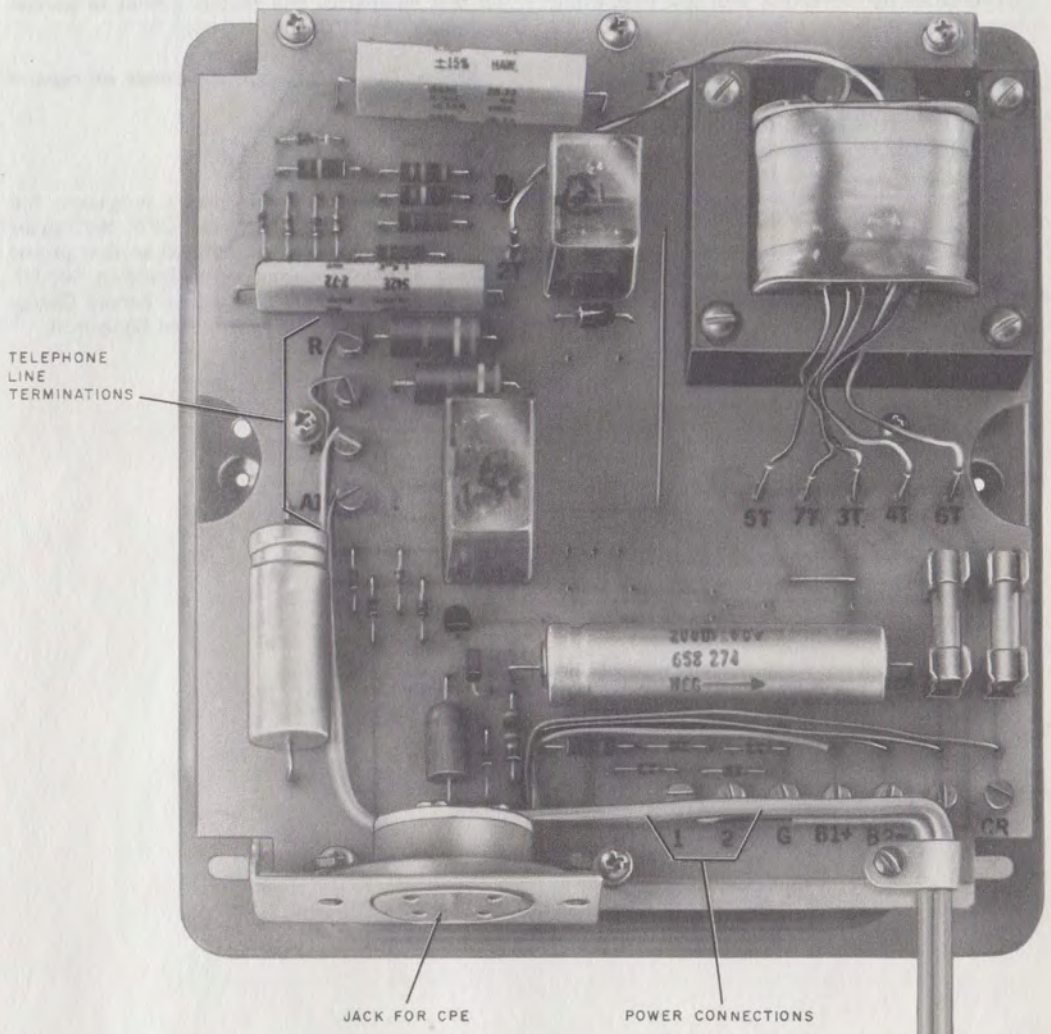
KS-21440, List 1 Coupler, Cover Removed
